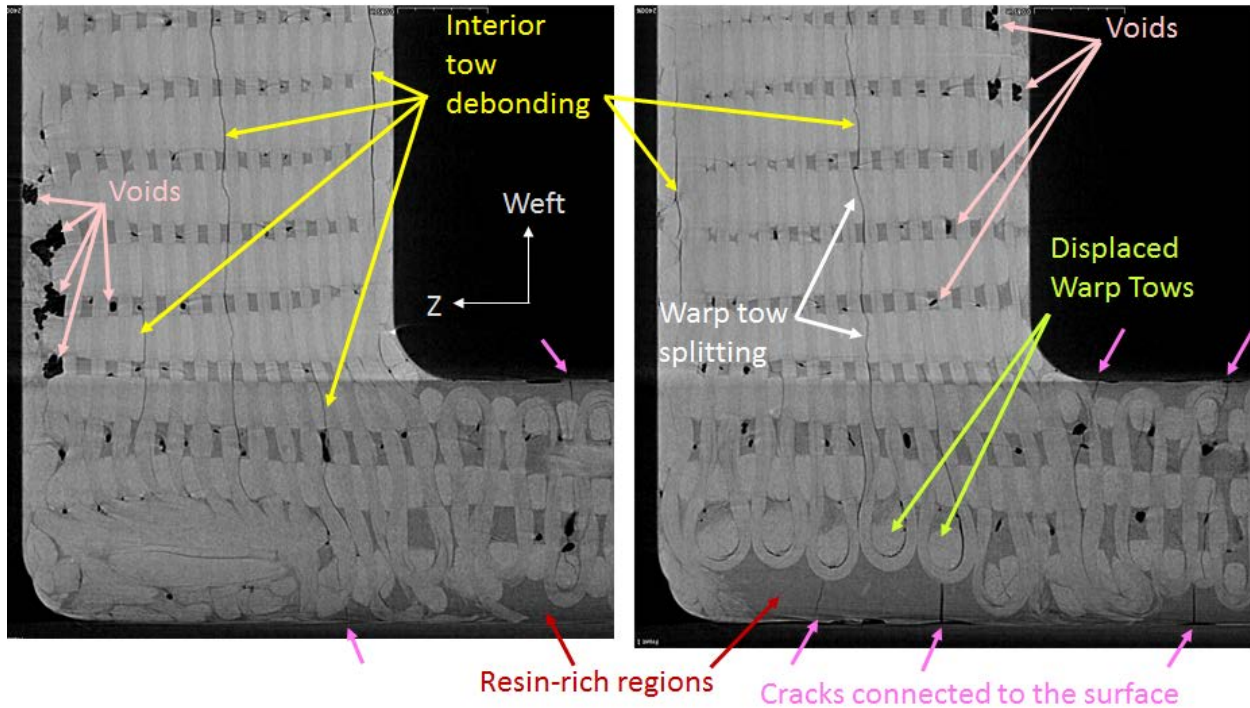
Pretest X-Ray CT images of cross-section of C-channel coupon specimen exhibiting manufacturing-induced defects.
